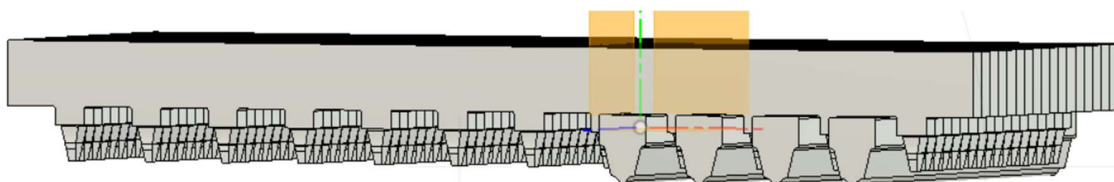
Cone Plates packed to form a Cone Array.
